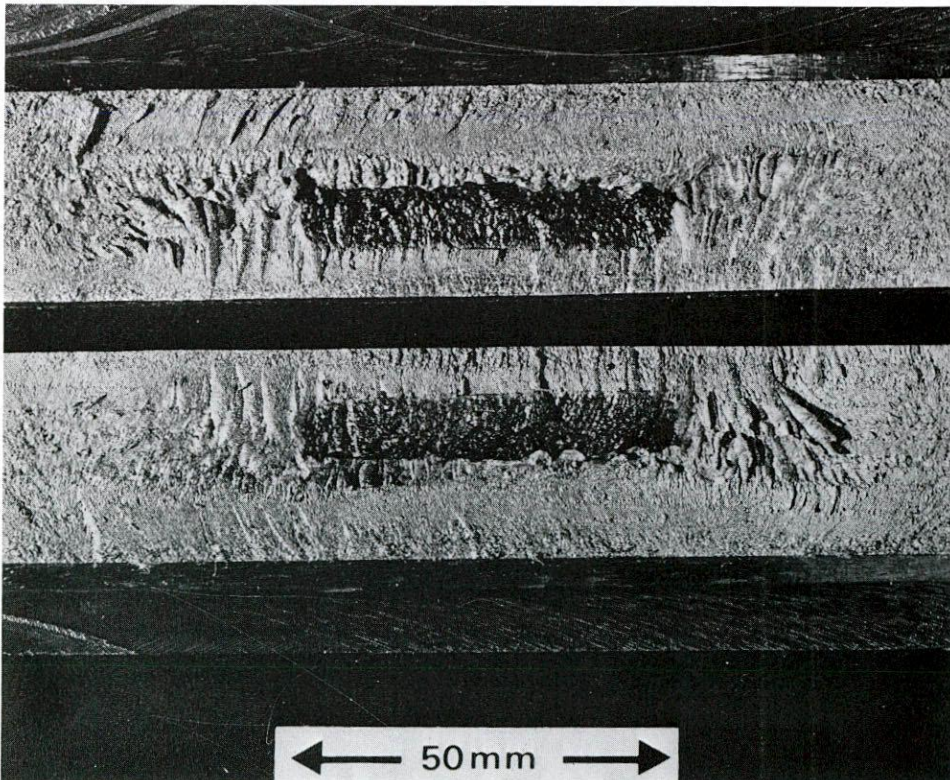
Fracture surfaces revealing freeze-break crack, defect 29.
